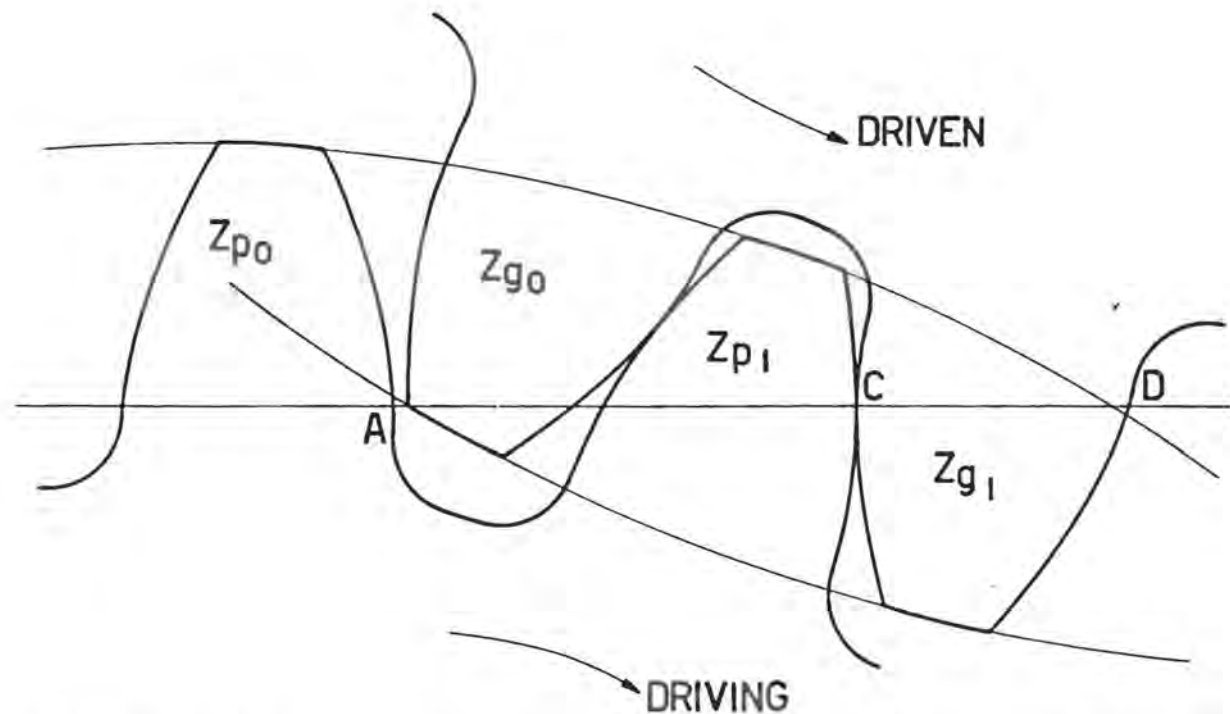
REDUCING ENGAGEMENT SHOCK BY ENLARGING THE BASE PITCH OF THE DRIVING GEAR
